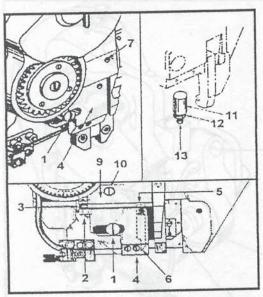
Staple Left Leg and Movable Cutter Adjustment
